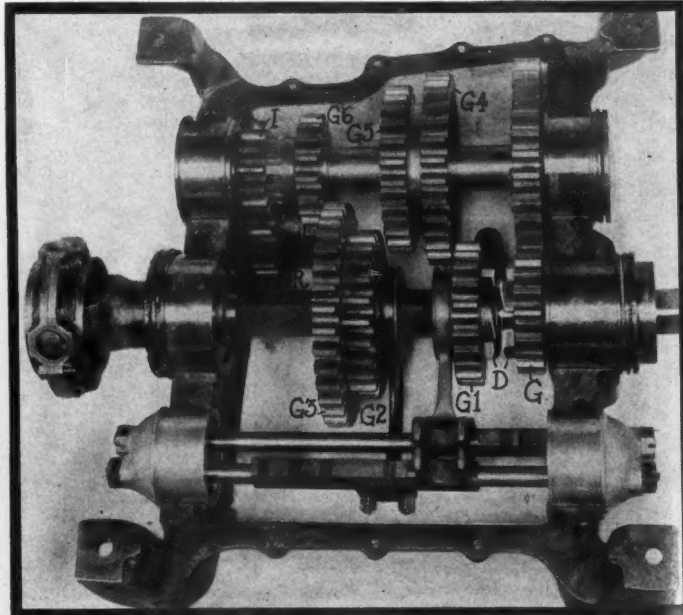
SELECTIVE GEARSET IN LOCOMOBILE CARS
